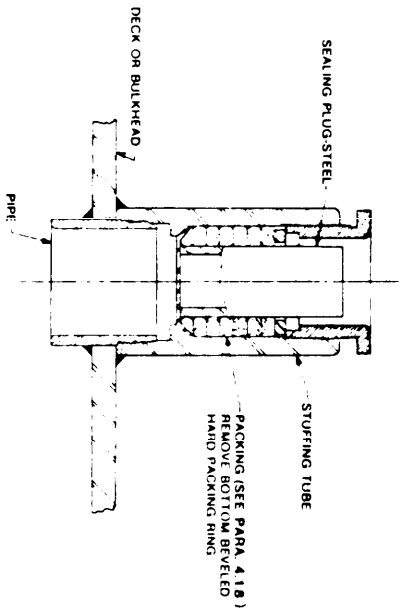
Sealing degaussing cable in bulkhead stuffing tubes.
